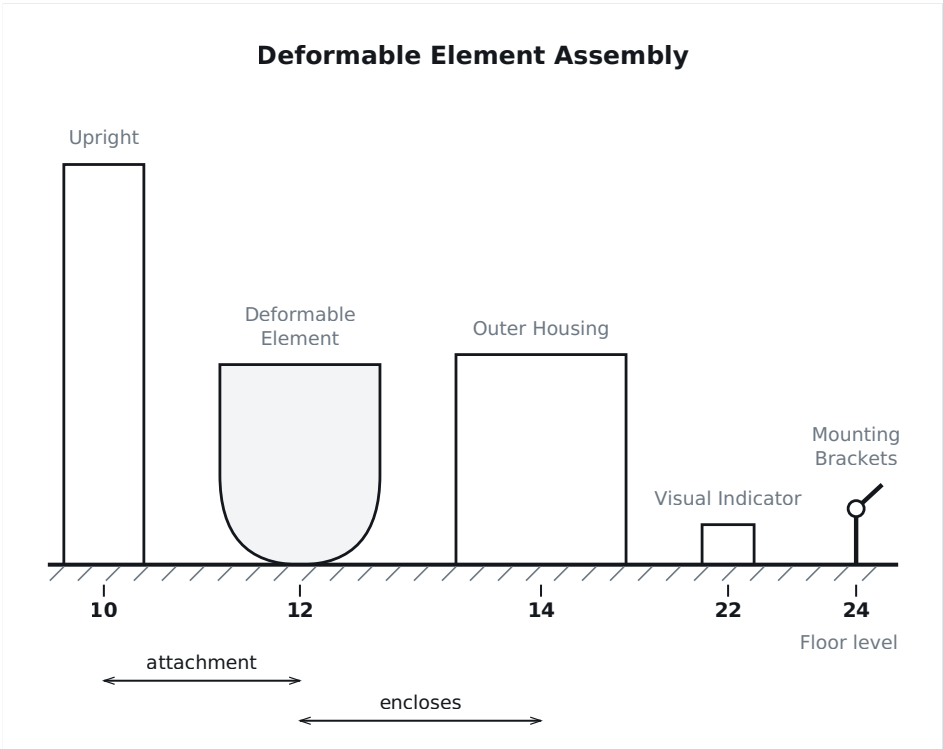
Elevation view of the deformable element mounted to a rack upright. PNG
